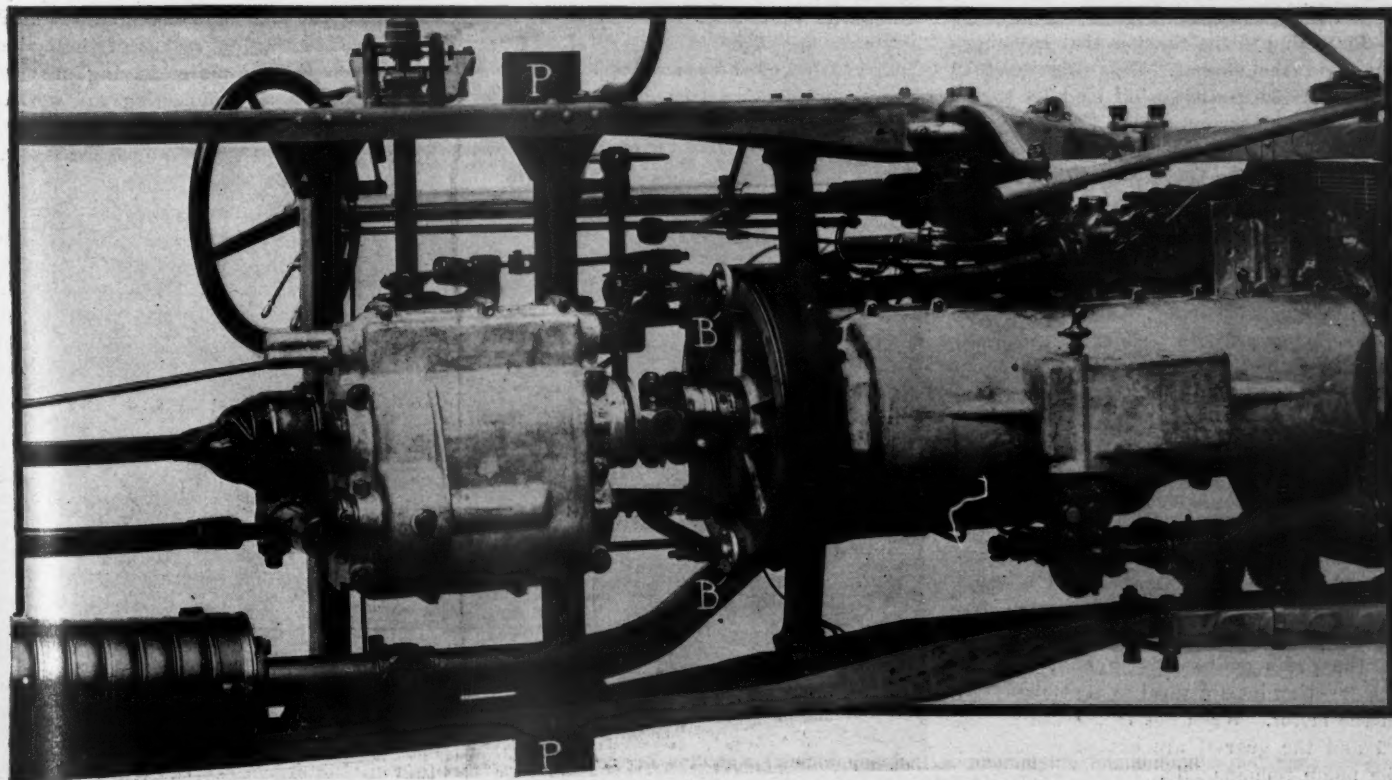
BOTTOM VIEW OF PIERCE CHASSIS ILLUSTRATING ARRANGEMENT OF CLUTCH BRAKE B
